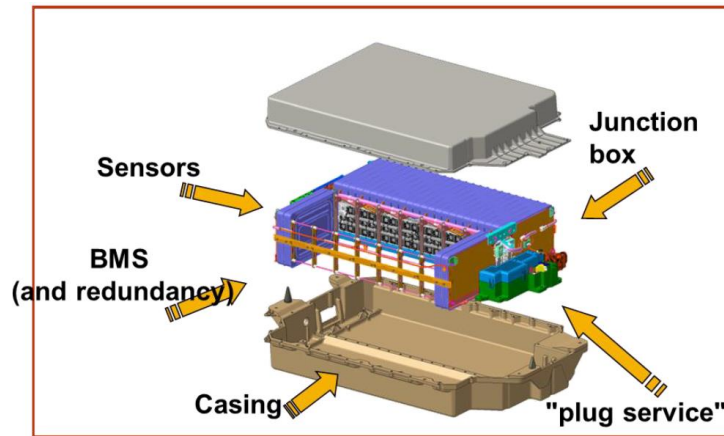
Exploded view of the battery pack installed in the ELSA system.
